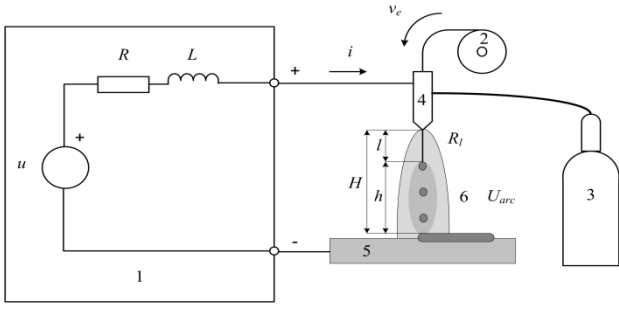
GMAW process with basic equipment. (1) Power source; (2) Wire feed unit; (3) Shielding gas; (4) Welding gun; (5) Workpiece; (6) Welding arc and material transfer process.
